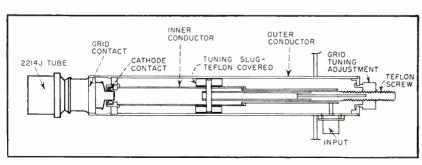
Simplified drawing of grid cavity for 2214J tube
